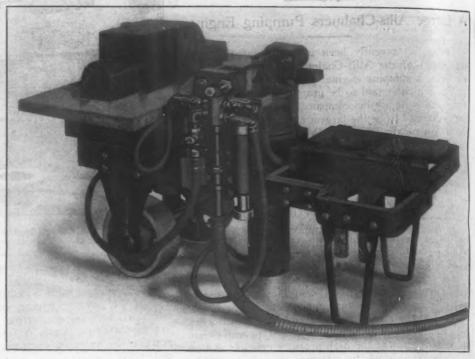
Pattern Ready for the Flask and Sand on the Little Giant Molding Machine Made by E. Killing's Molding Machine Works, Davenport, Iowa.
